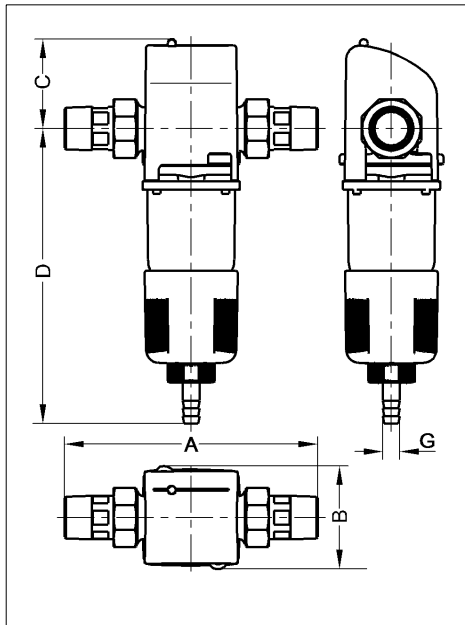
Installation dimensions JEF-B  $\frac{3}{4}$ " -  $1\frac{1}{4}$ "
